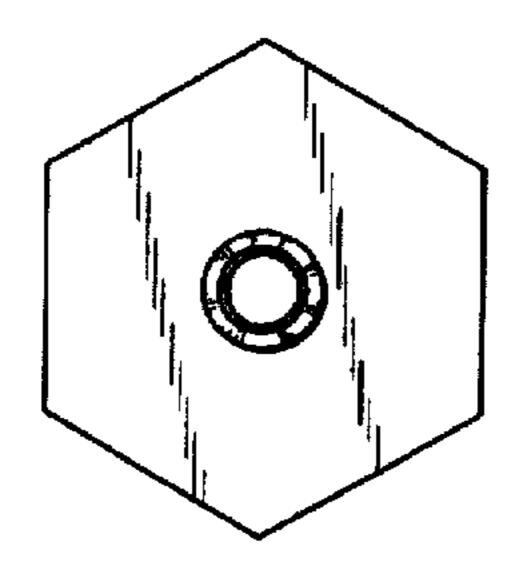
is a side elevational view of the welding-wire guide for arc coating devices of the present invention.
